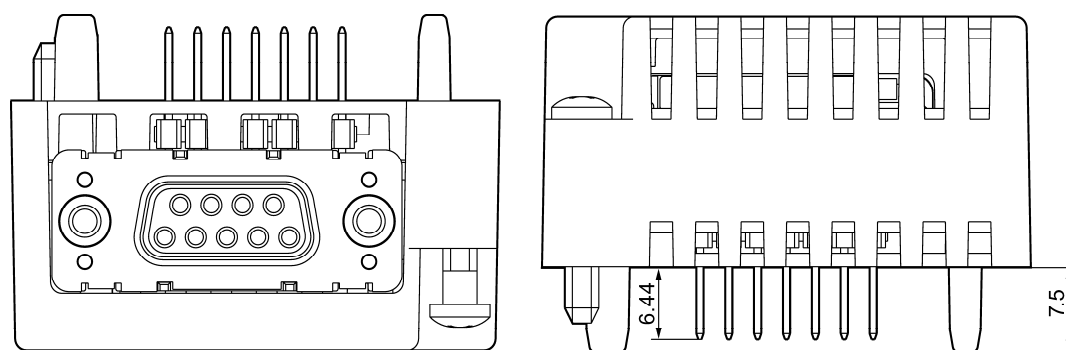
View from below and view from above with sub D socket connector and the dimensions of the plug connector between the 7KM PAC PROFIBUS DP expansion module and the 7KM PAC
